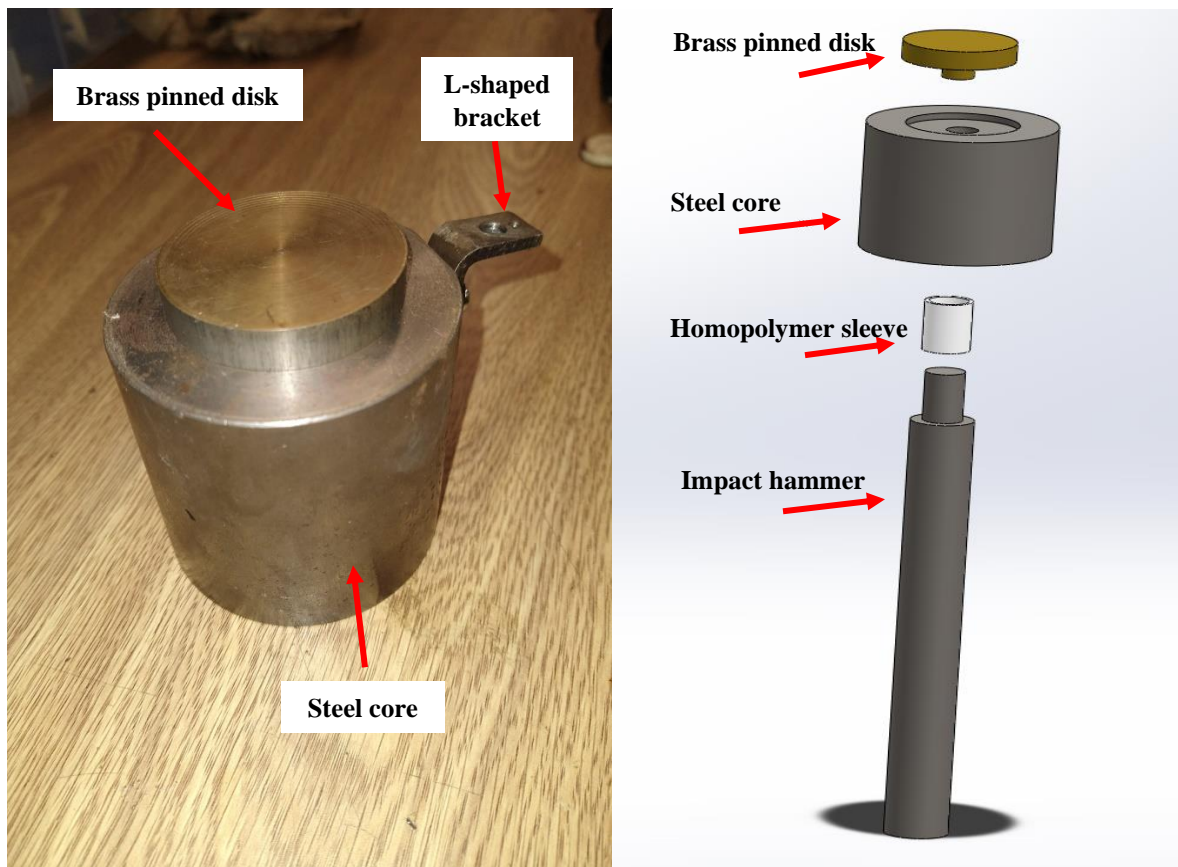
Impact head (left) and CAD drawing of impact head and hammer assembly (right)
